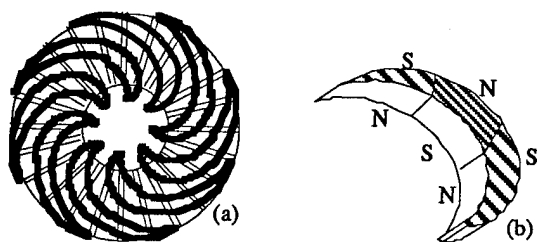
(a) Cross section through impeller plane and motor stator and (b) impeller vane with angular sectors.
